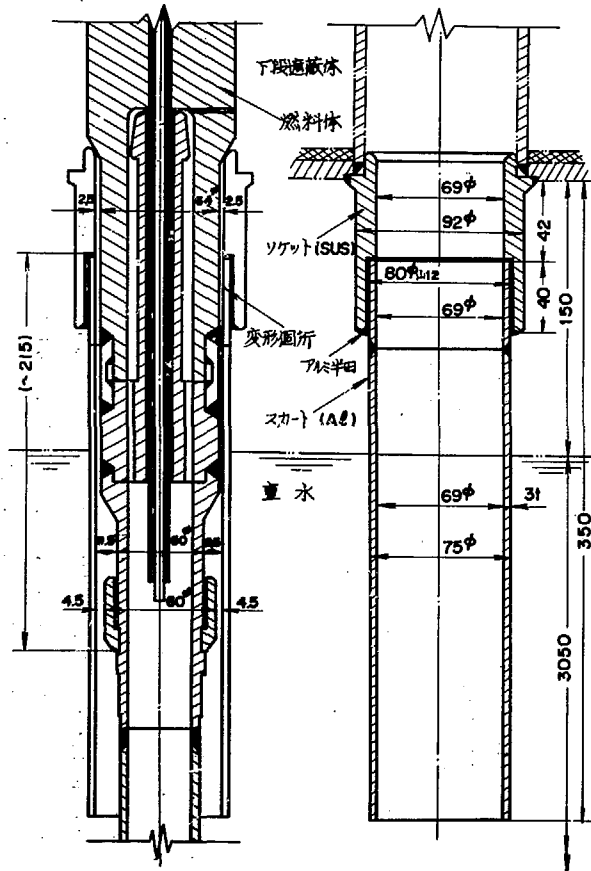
Diagram of fuel assembly and its guide tube in JRR-3.
